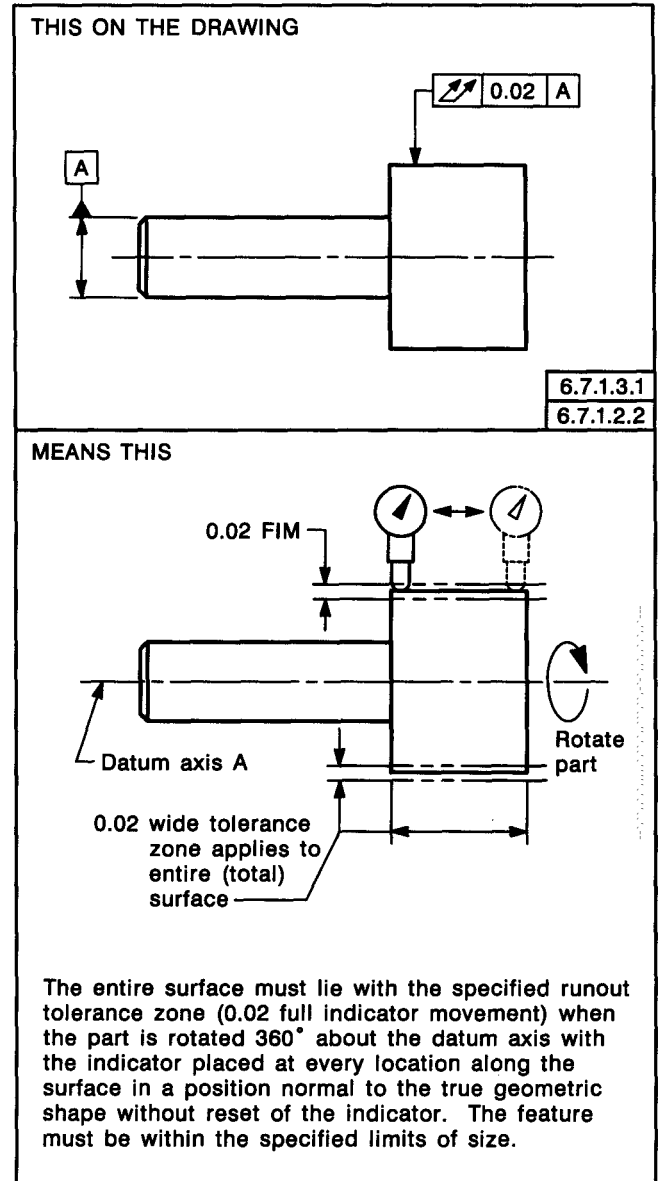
SPECIFYING TOTAL RUNOUT RELATIVE TO A DATUM DIAMETER
